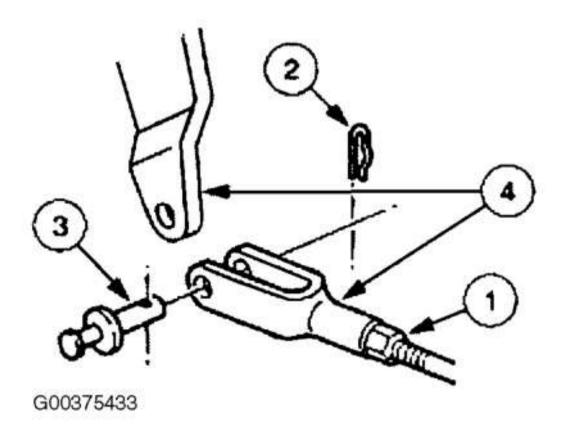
Removing Adjusting Clevis Courtesy of FORD MOTOR CO.
